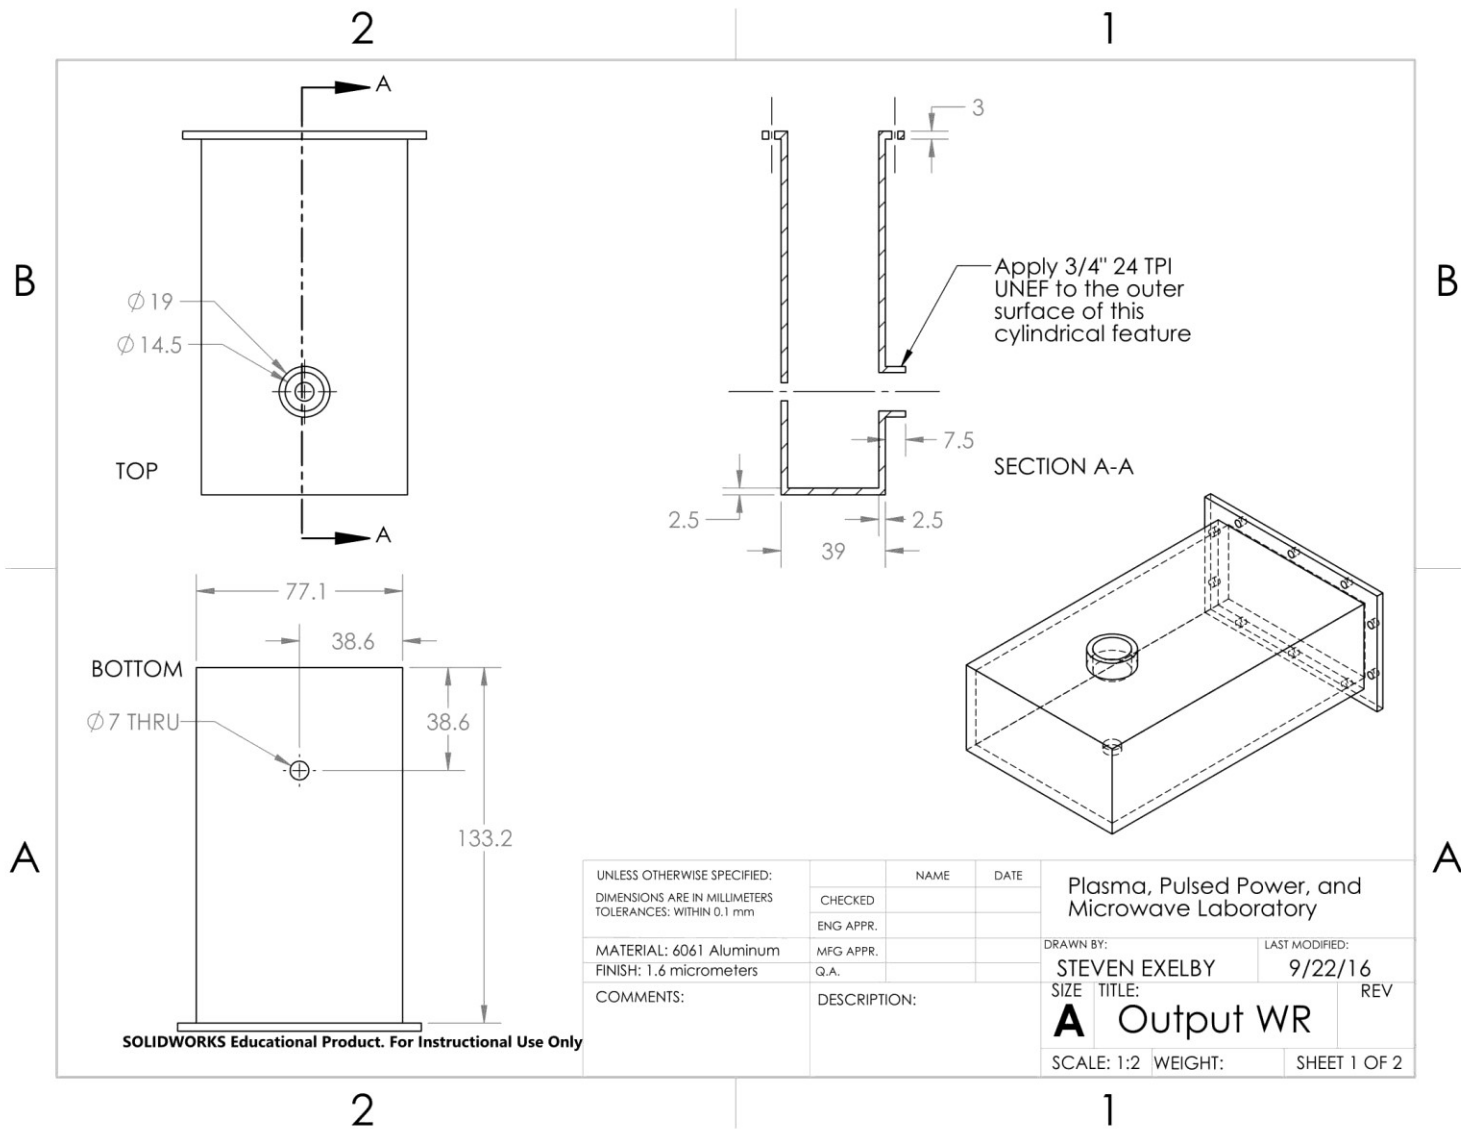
Output side waveguide to RPCFA adaptor. A puck coupler is bolted through the small hole in the bottom, page 1.
